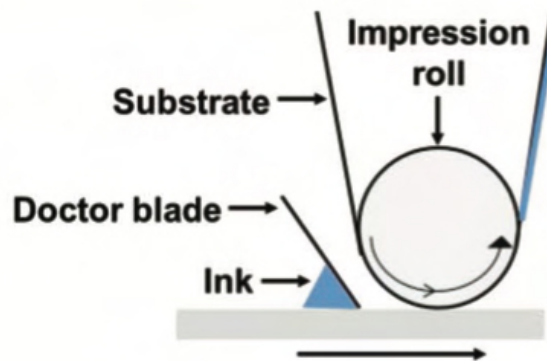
Configuration of the inverse gravure printing technique [12].
